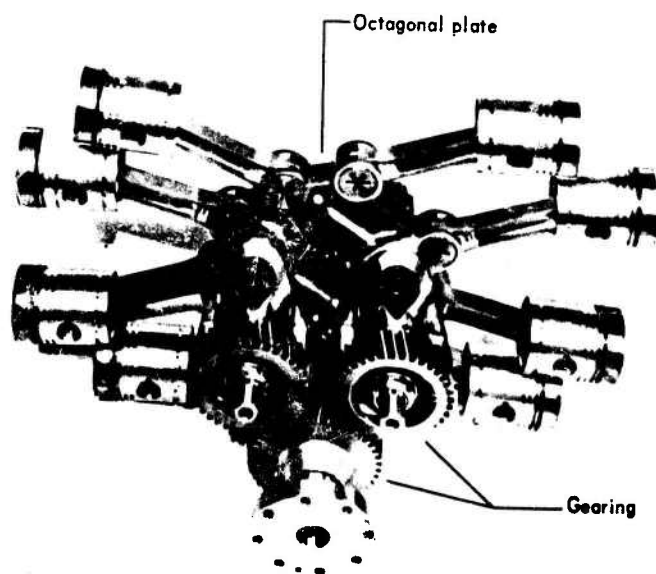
Power-Producing Components and Geared Offset Drive-Shaft Configuration of Dynastar Engine
